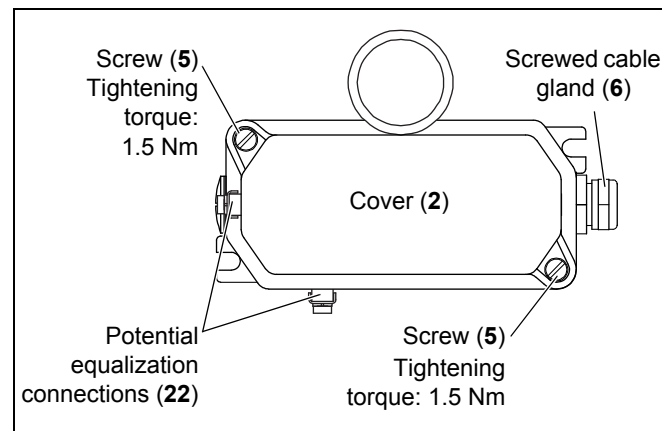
Mounting the belt misalignment switch onto the conveyor
